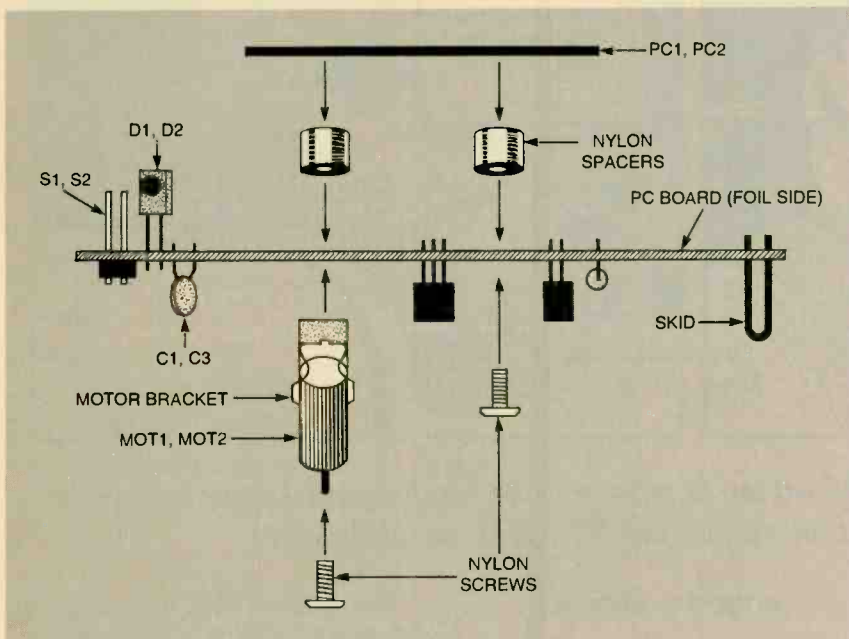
Some of the Solbot's parts mount onto the foil side of the board, including its photo diode "eyes" and the "feeler" switches.
